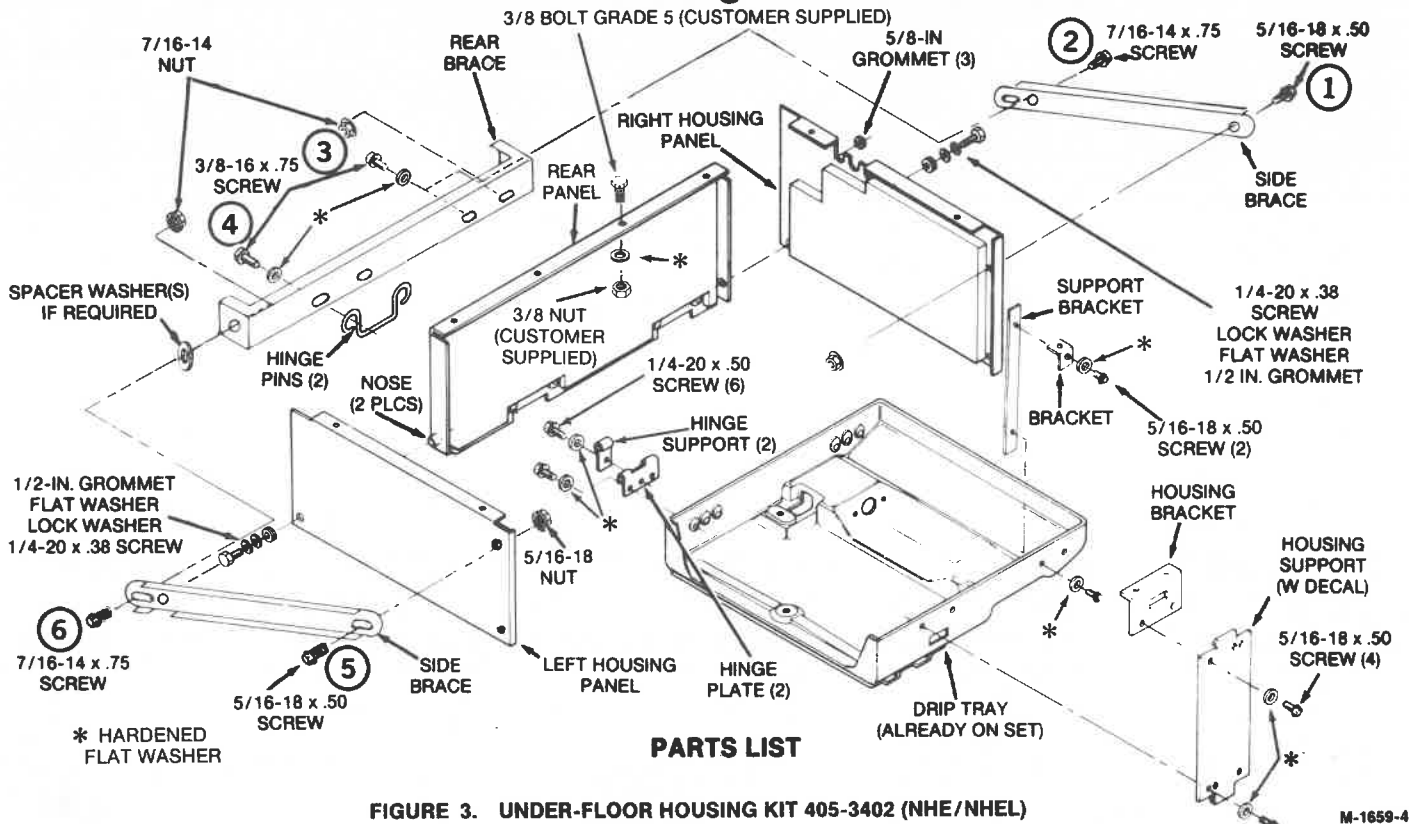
UNDER-FLOOR HOUSING KIT 405-3402 (NHE/NHEL)
